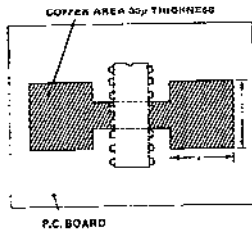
External Heatsink Mounting Example ($\theta_{JA} = 25^{\circ}C/W$)
